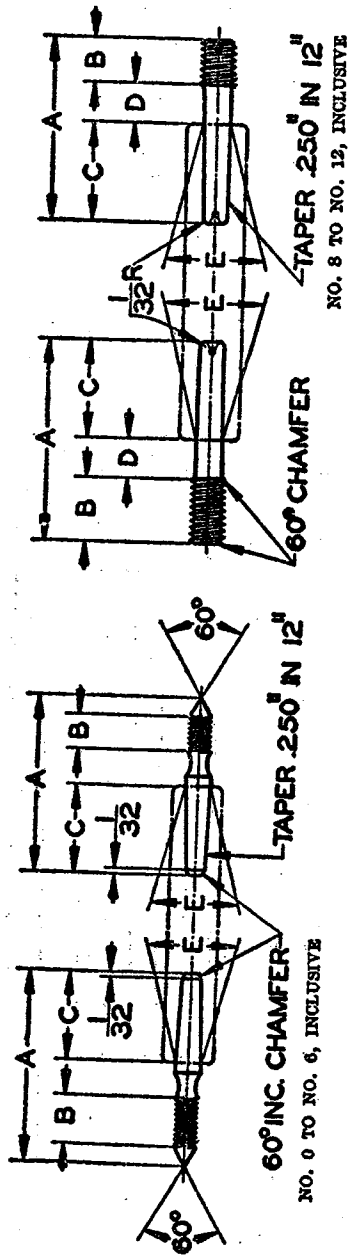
American Gage Design Standard thread plug gages, details of construction.
